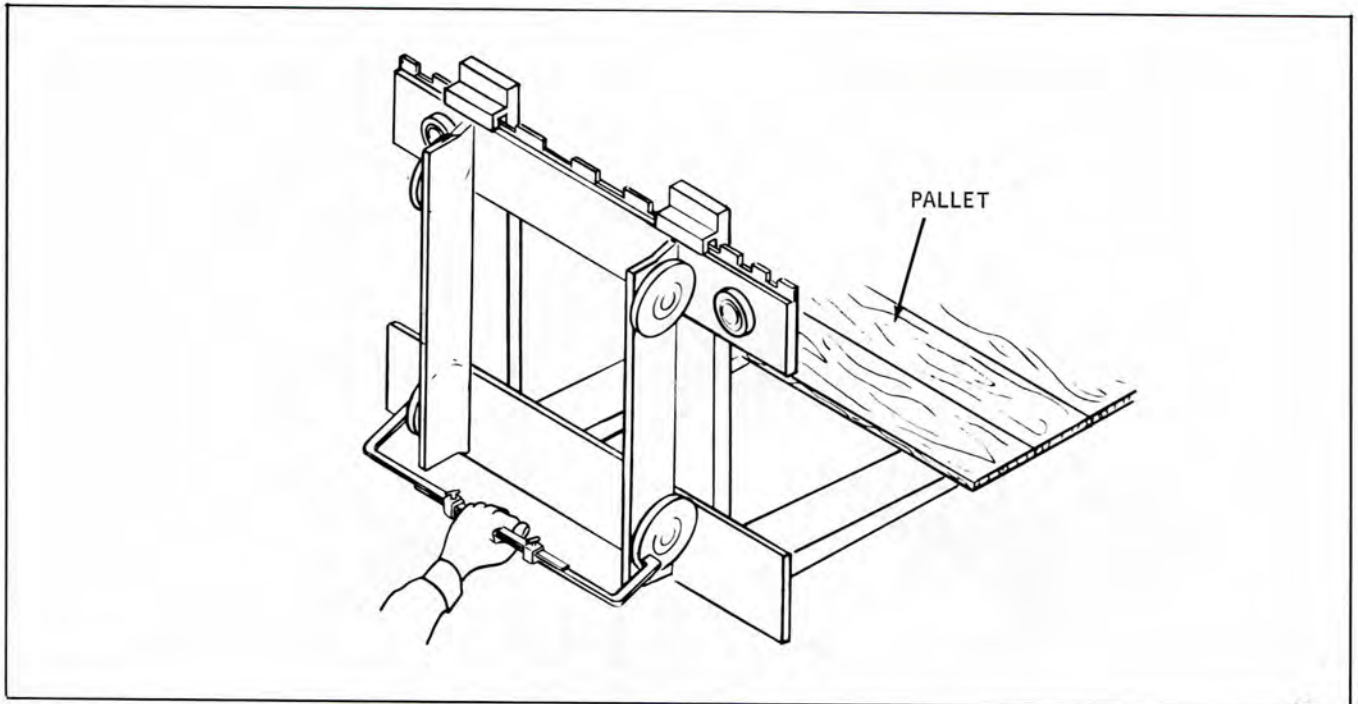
Spanning Lower Rollers (Four Roller Carriage)
